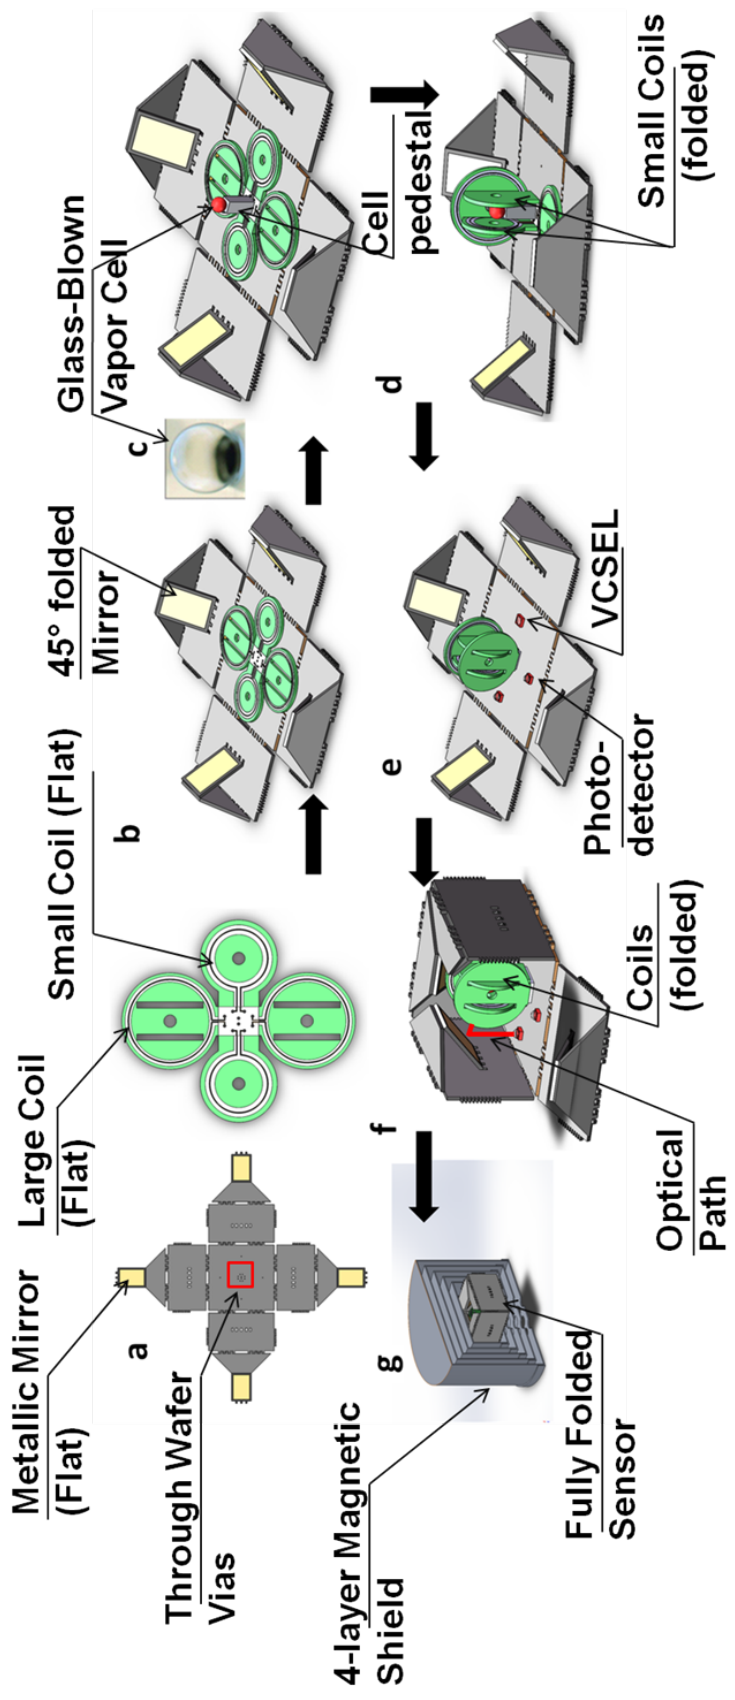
Conceptual drawing of the folded micro-NMRG. (a) Double-folded structure and coils fabricated on a flat wafer, (b) Initial folding of backbone structure with co-fabricated mirrors, (c) Assembly of glassblown micro cell, (d) Coils are folded, (e) VCSELs and photo-detectors are assembled, (f) Backbone structure is fully folded, (g) The sensor is placed inside magnetic shields (a cross-section view of the shields)
